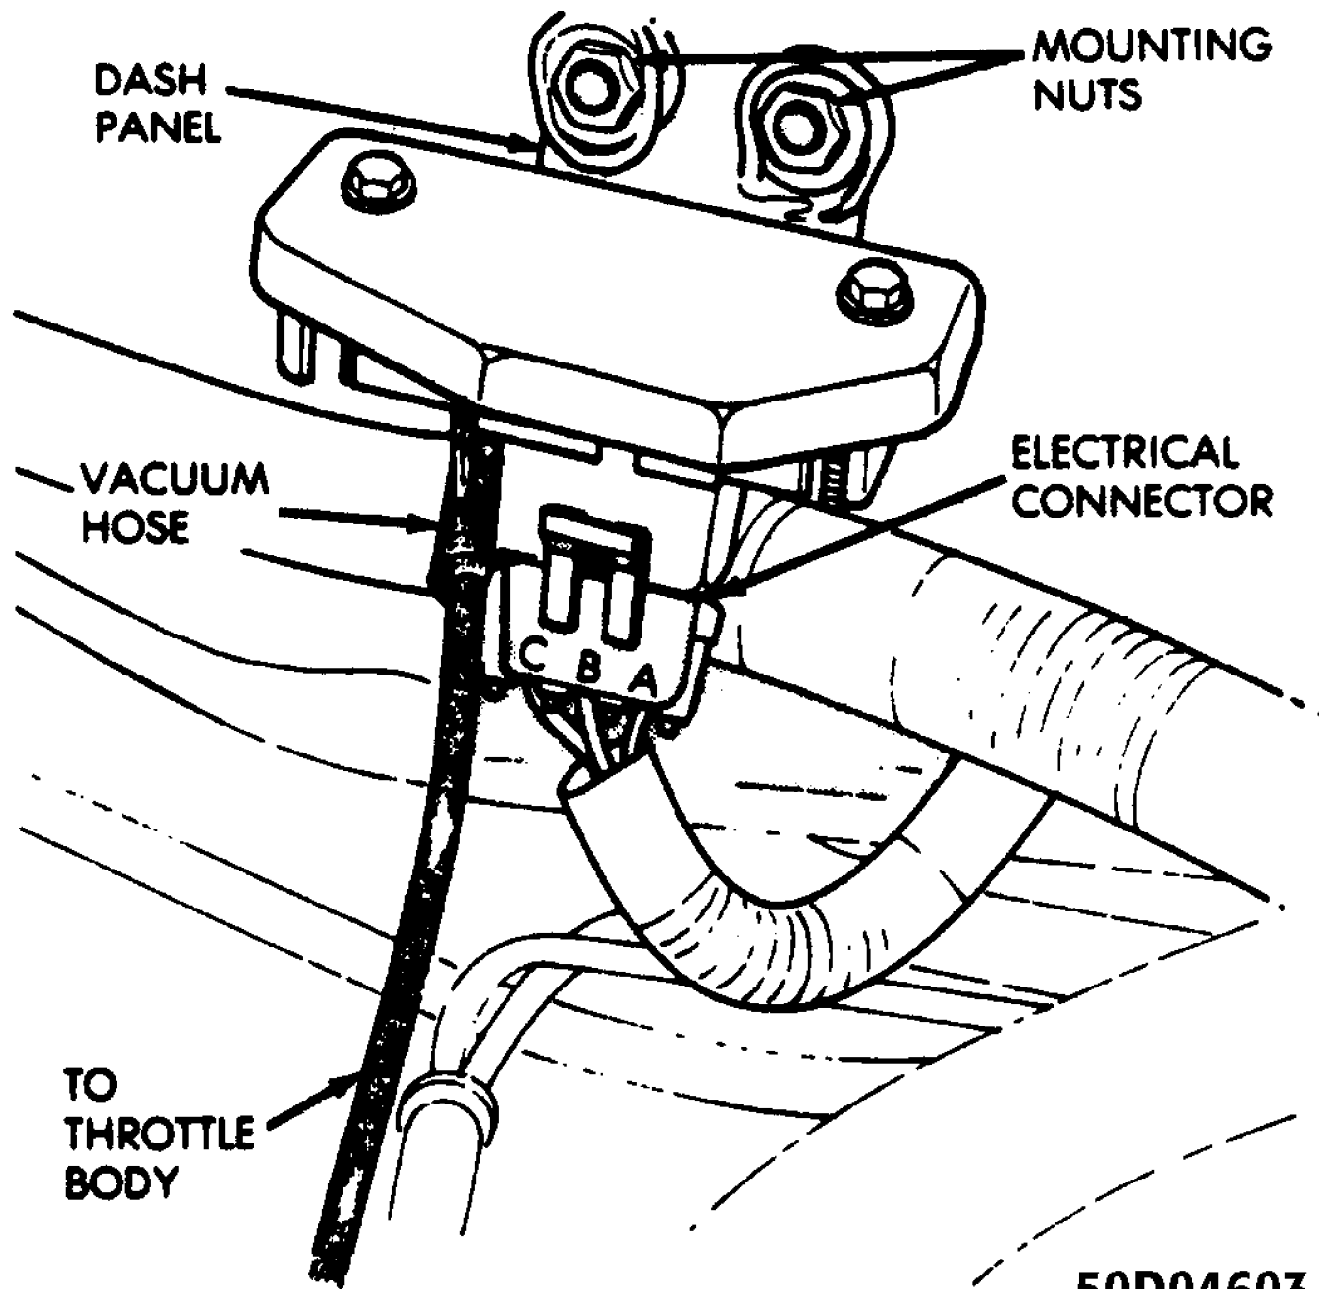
View of Manifold Absolute Pressure (MAP) Sensor Mounting Nuts & Vacuum Supply Hose
